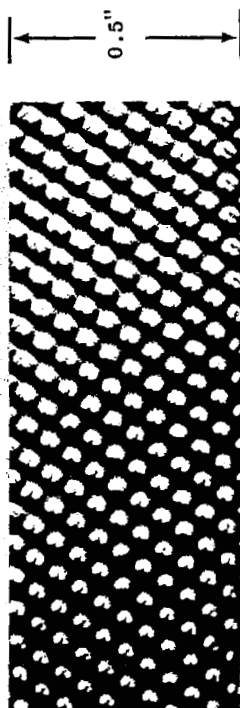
Dimpling of 0.5-Inch Wide x 0.002-Inch Thick Cb-12r Foil for use in Insulating Loop Components. Enlarged View of Dimpled Foil Shown.
